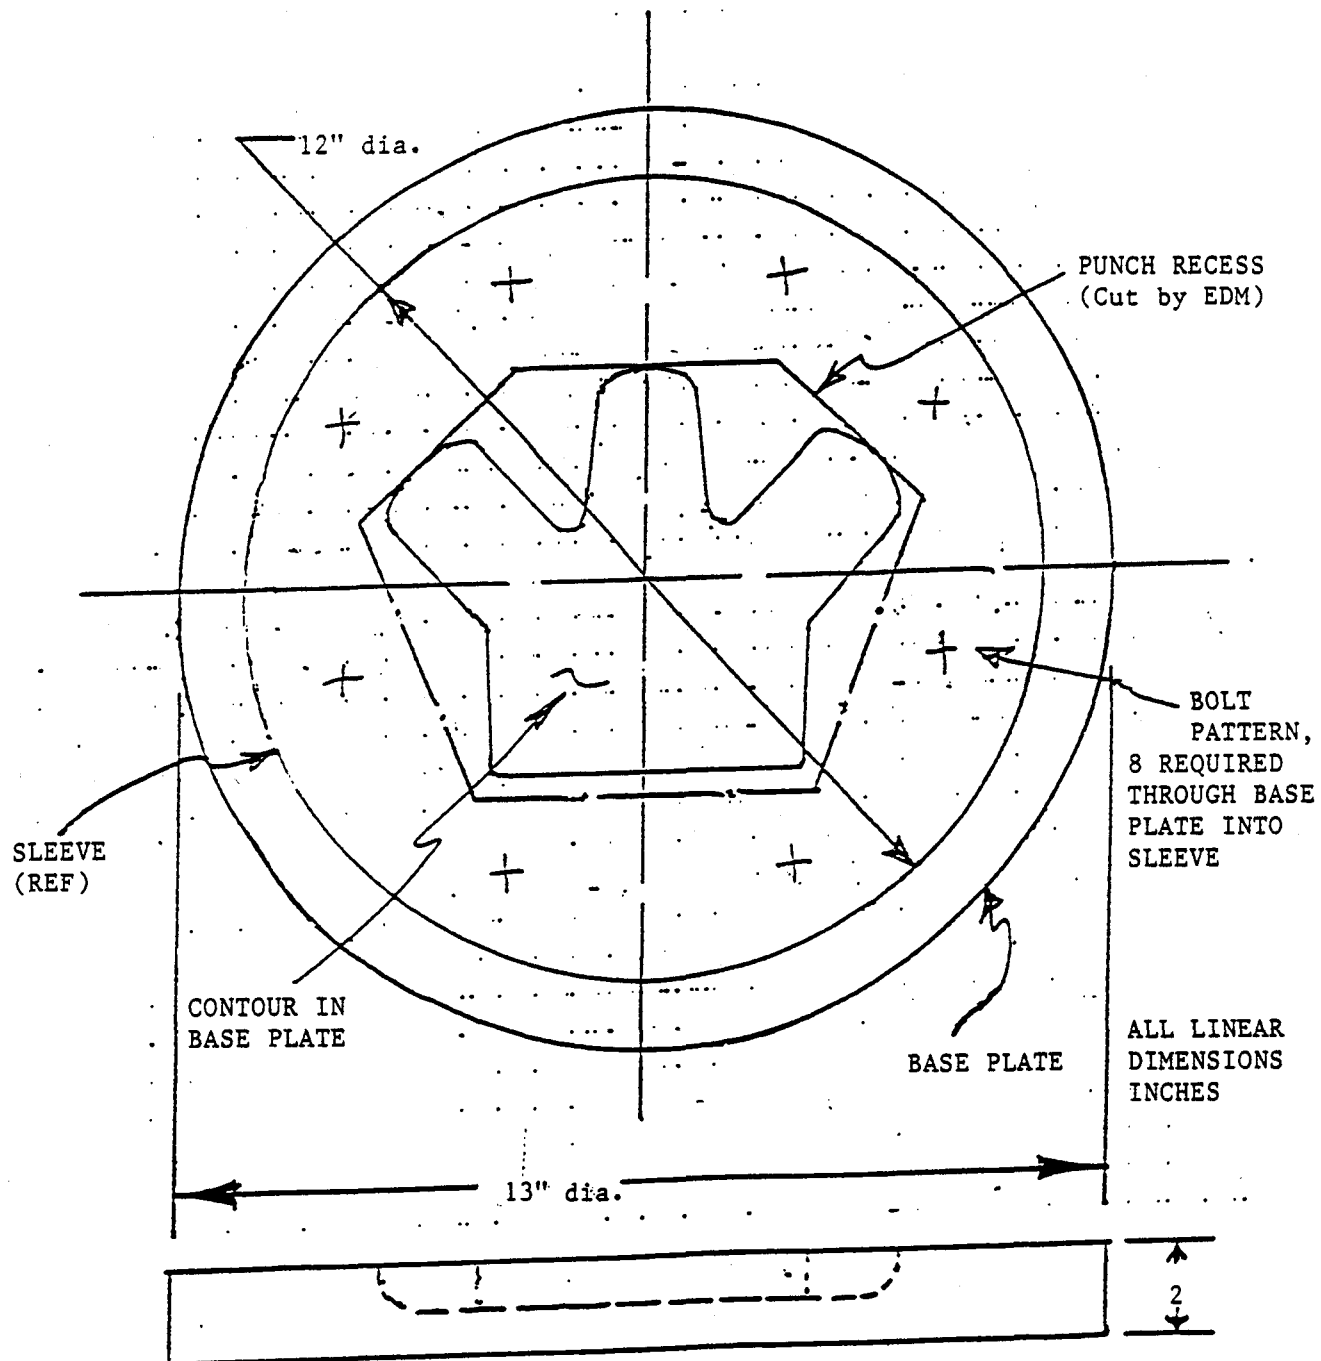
Forging Die Base Plate Including Top View Through Sleeve into Contour.
